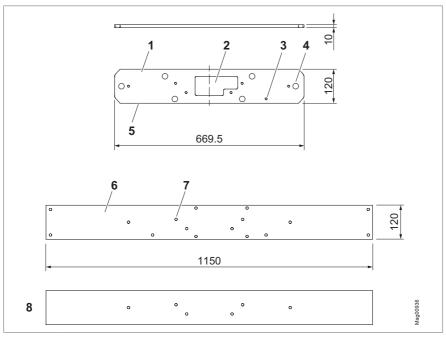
Base plate and drilling template mTripod FMTP-MS (dimensions in mm)
